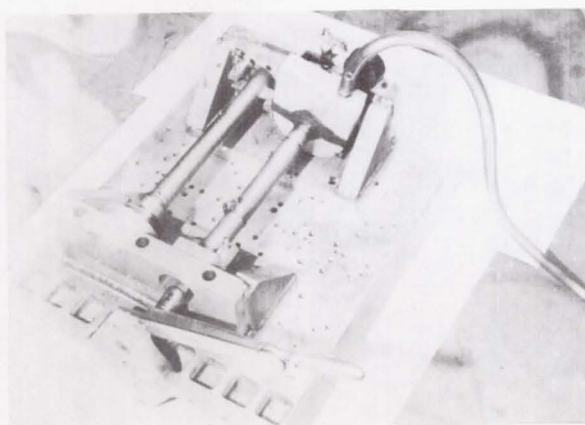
Torque and bending load fixture with vacuum chamber installed
